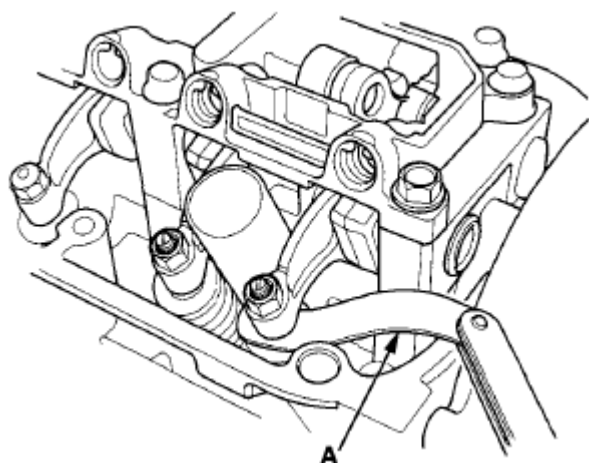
Inserting Feeler Gauge Between Adjusting Screw - Exhaust
